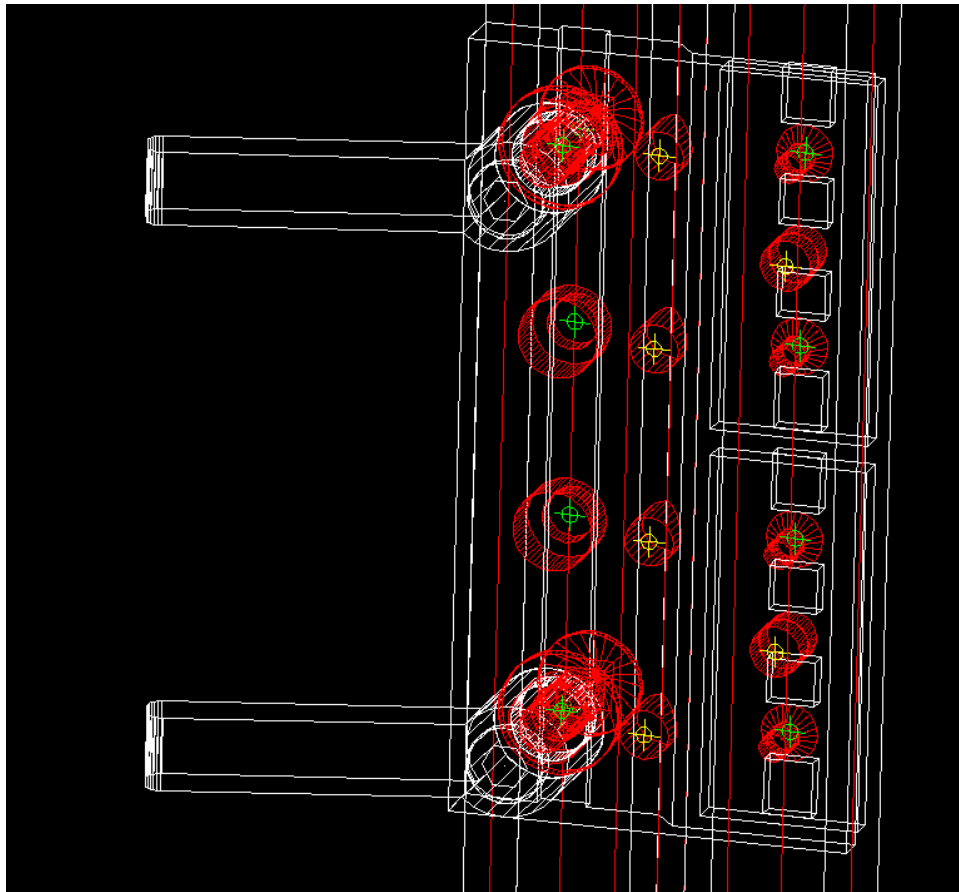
AutoCAD design of the Unibearing and Brakes Connecting to the 1010 Extrusions
